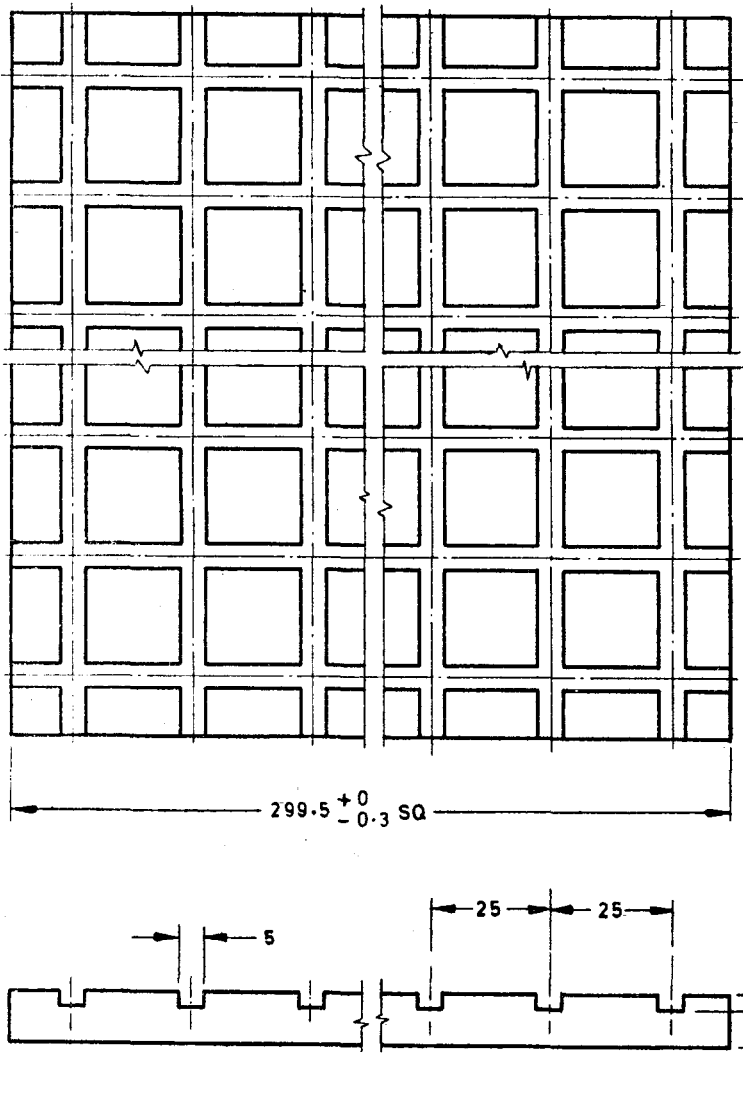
TOP AND BOTTOM PLATES — (Contd)
